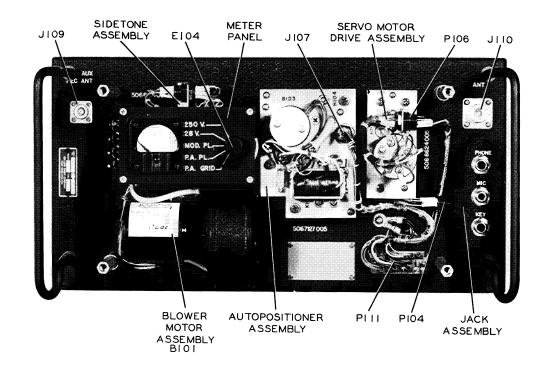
Transceiver 618S-1, Front Panel, Front View, Front Cover Removed
